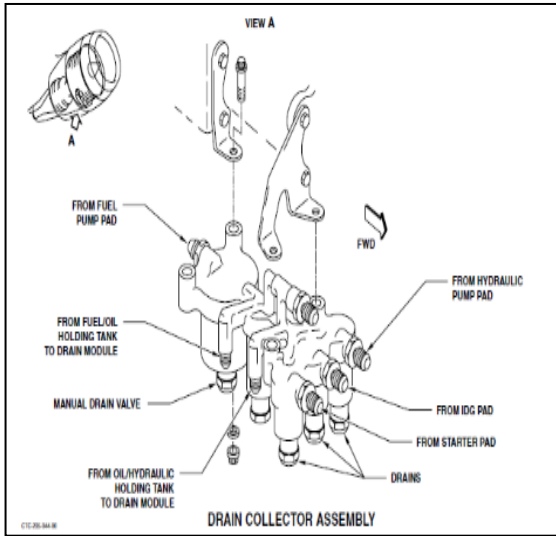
Drain Collector Assembly Installed Exactly at 6 O'clock Position
